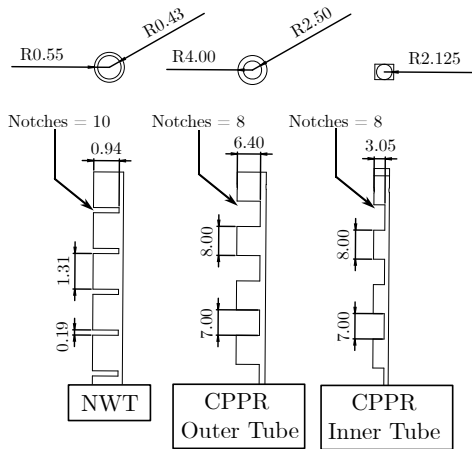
Dimensions of the continuum robots utilized in this study. In this figure, R denotes radius of the tube. All dimensions are in millimeters, except for the notch count.
